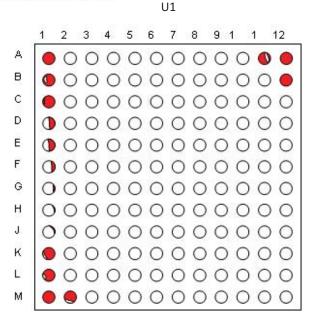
Crack map of group A WLP after drop test (red areas correspond to solder joint IMC crack at package side).
